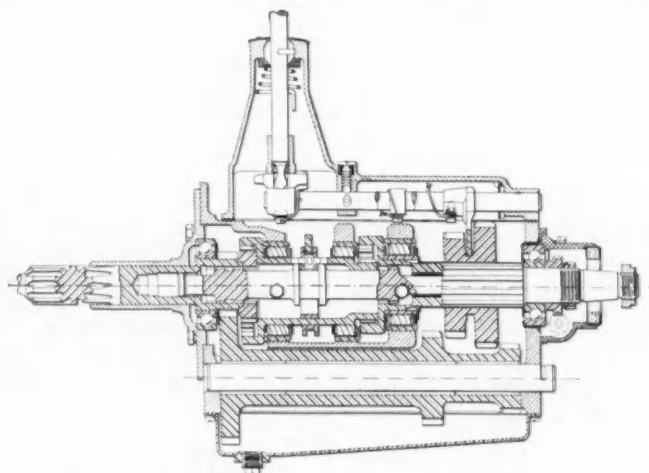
WARNER GEAR CO. FOUR-SPEED GEARSET
